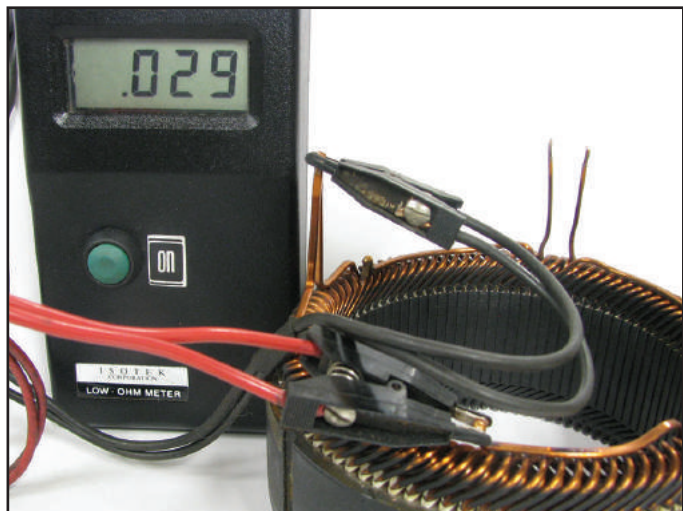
Reading the resistance of one coil in the delta stator, between a lead and the spot weld, we get .029 ohm.
